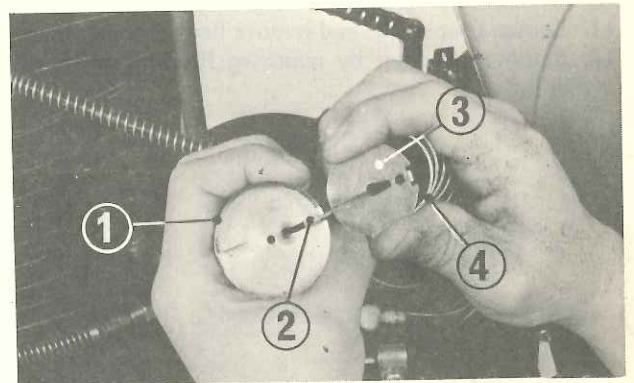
(1) Throttle valve (2) Throttle cable end (3) Clip plate (4) Carburetor spring
